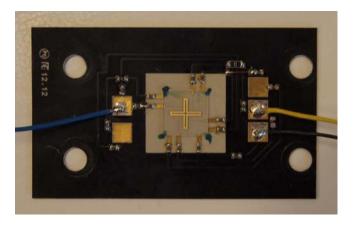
Fabricated PRS unit cell mounted on the PCB with bias circuitry.
